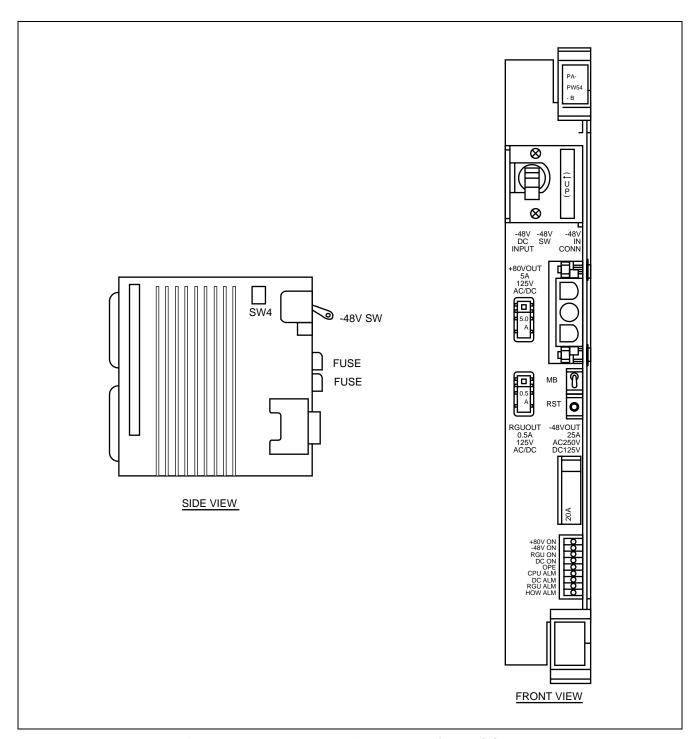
Face Layout of PA-PW54-B (DPWR) Card
